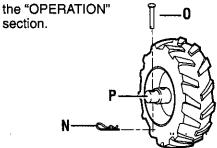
To roll the tiller, move both wheels to the FREEWHEEL position.
